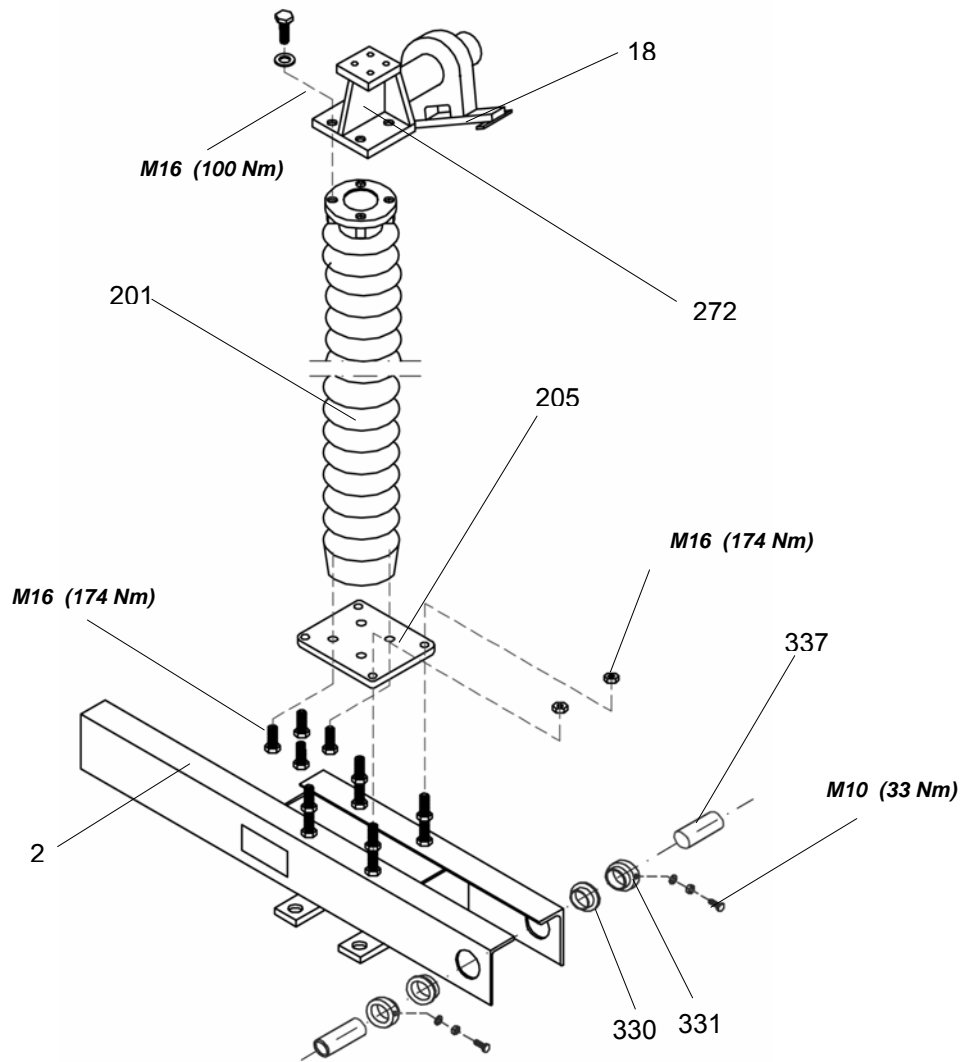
Mounting of post insulator and contact support (insulators with pitch diameter Ø 127 mm)
